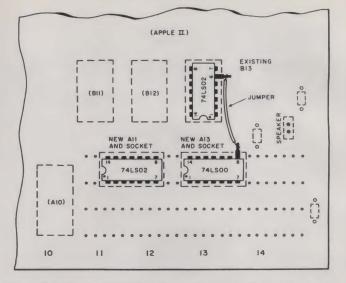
Top view of lowercase modifications. Jumper shown eliminates the need for foil cut.
